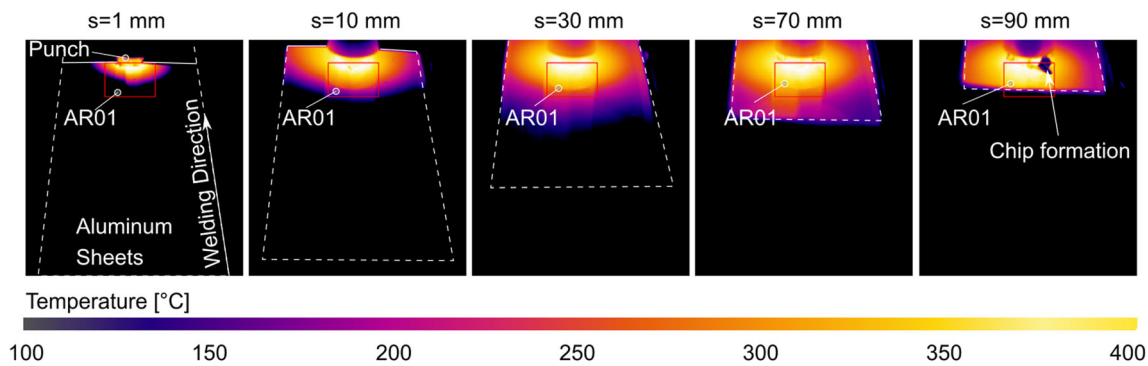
IR image during FSW showing the area AR01 ($\omega = 800$ RPM and $v_f = 21$ mm/min). The welding direction indicates the movement of the aluminum sheets
